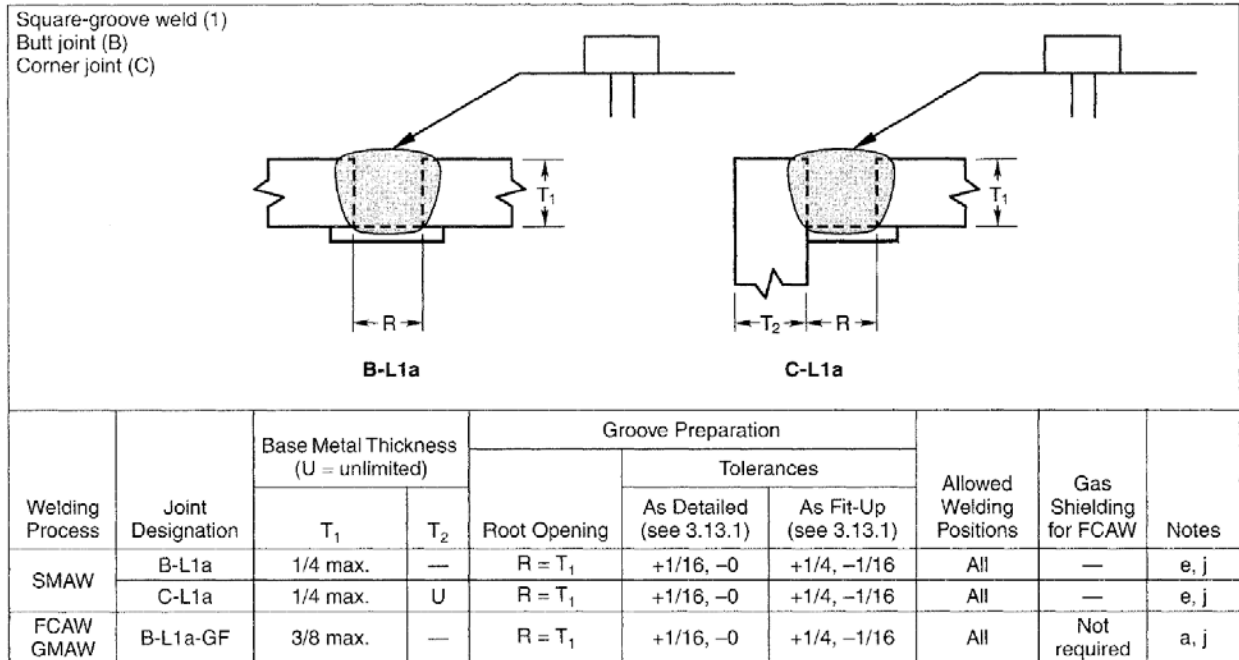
AWS D1.1 Figure 3.4 – Prequalified CJP Groove Welded Joint Details
